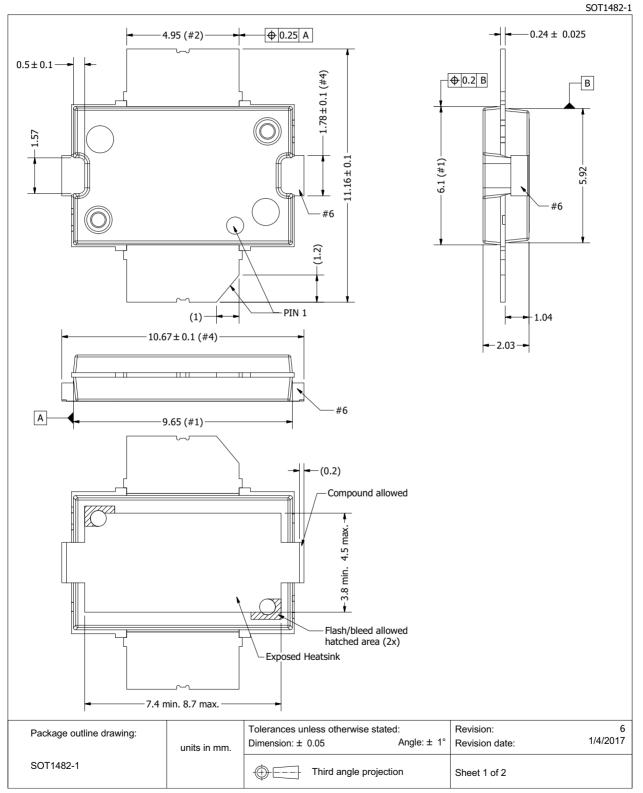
Package outline SOT1482-1 (sheet 1 of 2)
